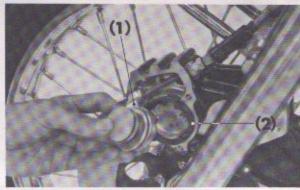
(1) Brake arm (2) Thrust plate guide
